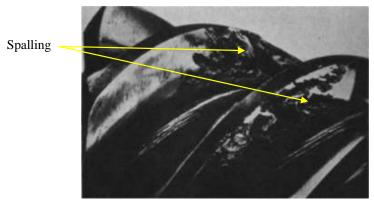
Spalling of a hardened pinion Source: Adapted from [29]
